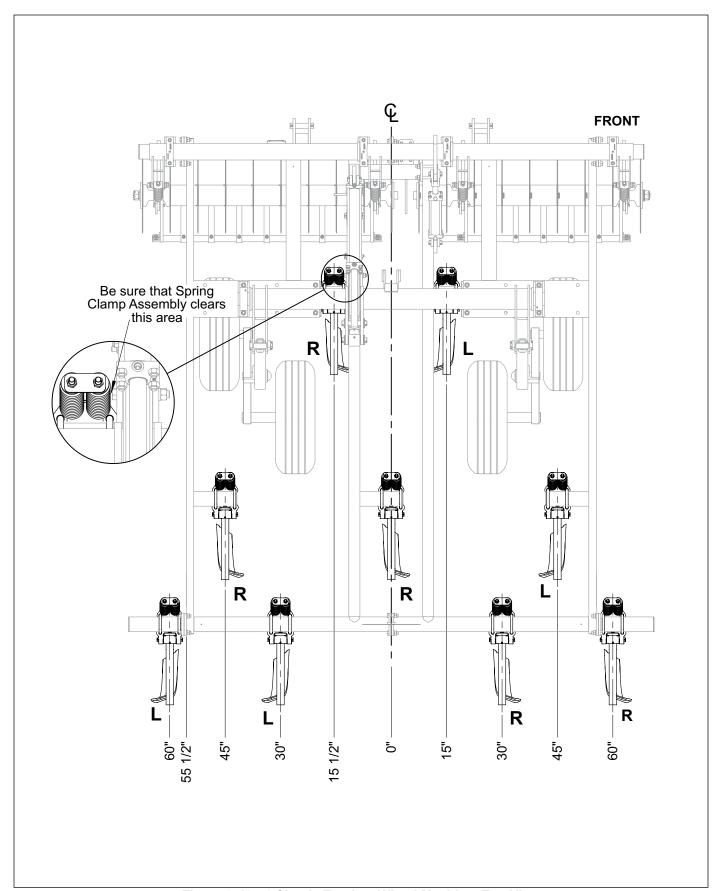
9 Shank, Tandem Wheel Machine, Top View
